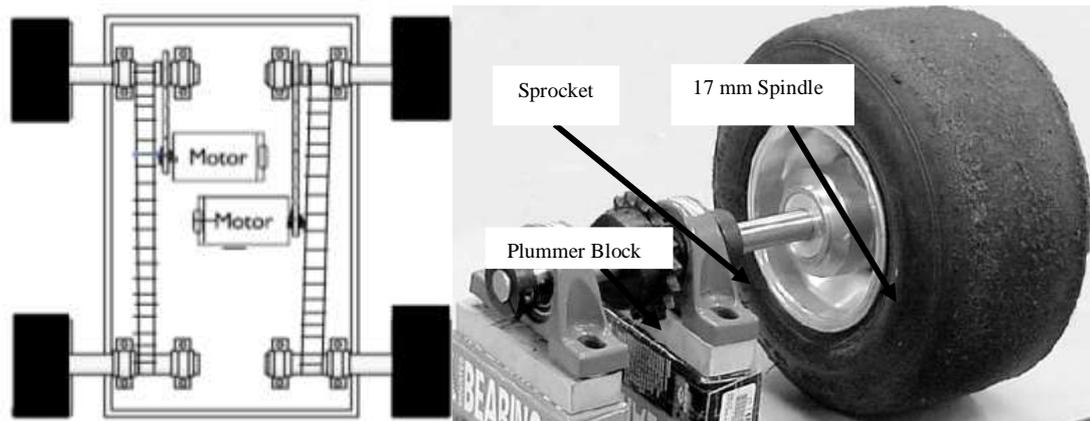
Schematics of Motor Arrangement, and Arrangement of the Wheels and Axle
